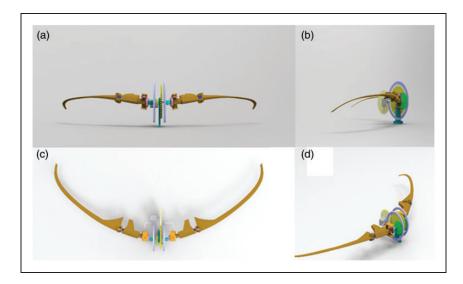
a) Front view b) side view c) top view and d) isometric view of the mechanism modelled in SolidWorks.
